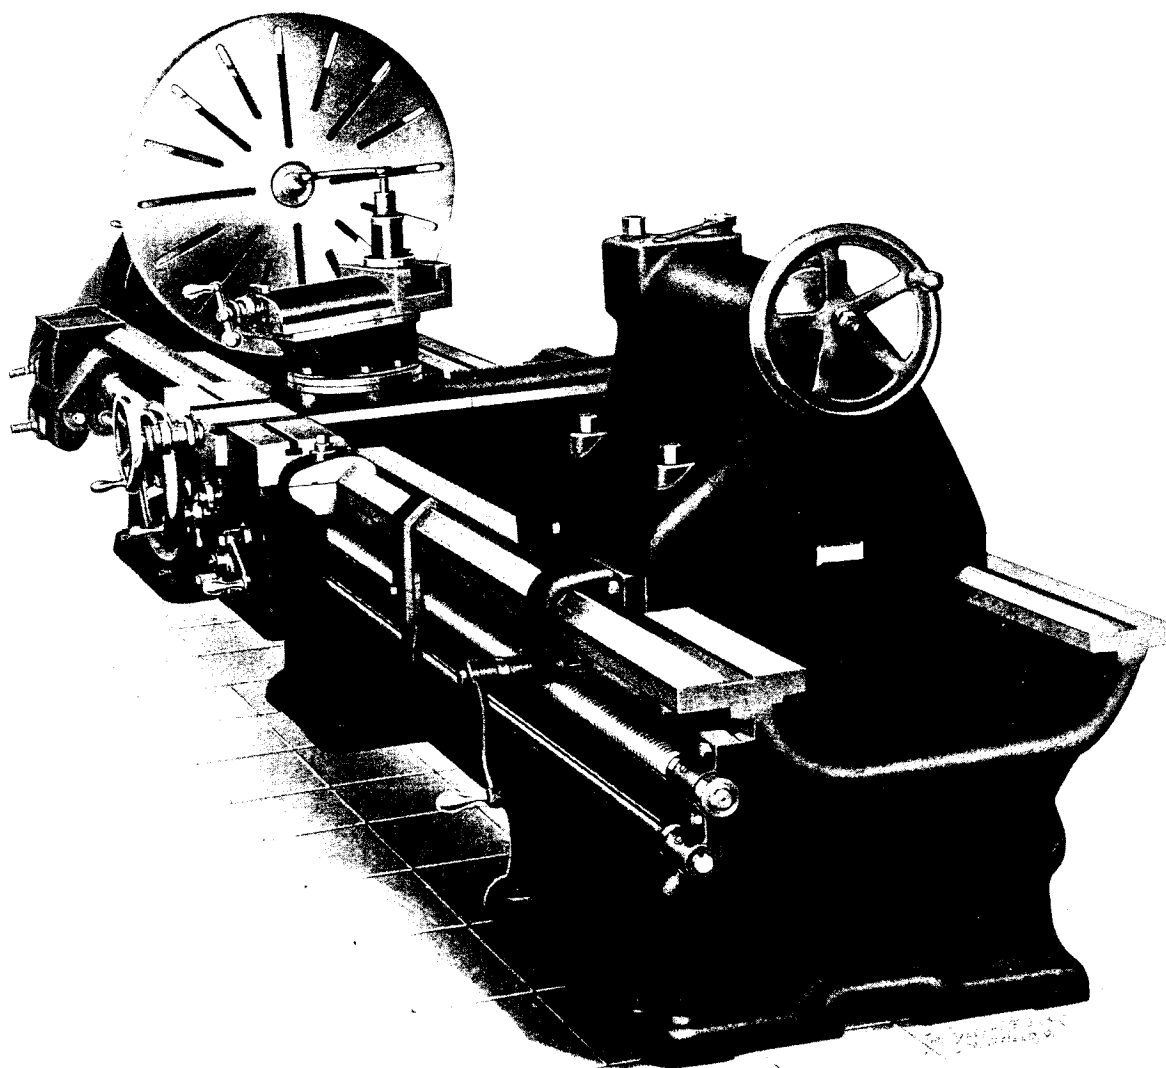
End View 36" Lathe. Note wide vees, extra wide bearings for tailstock, carriage and headstock.
